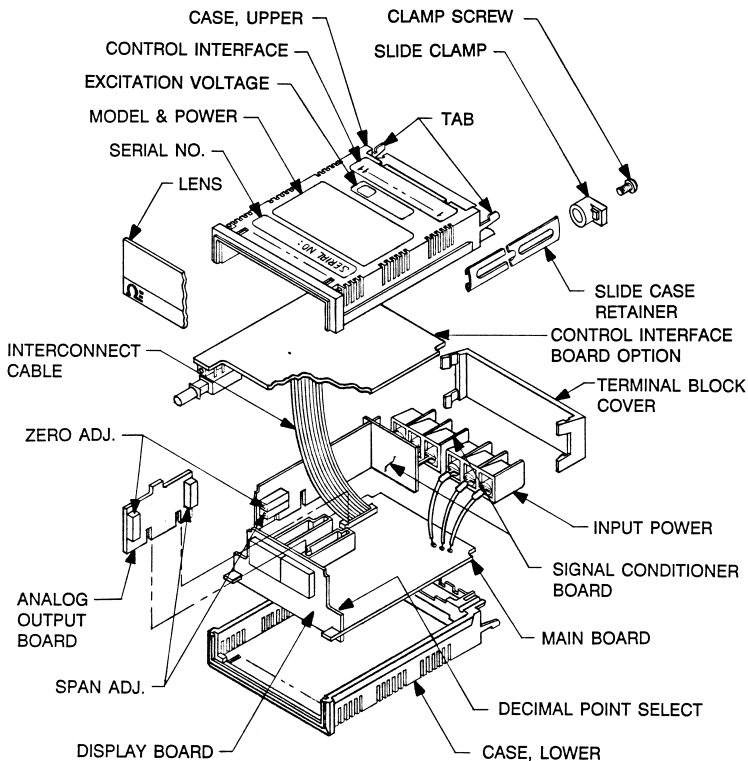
OMEGAROMETER EXPLODED VIEW
